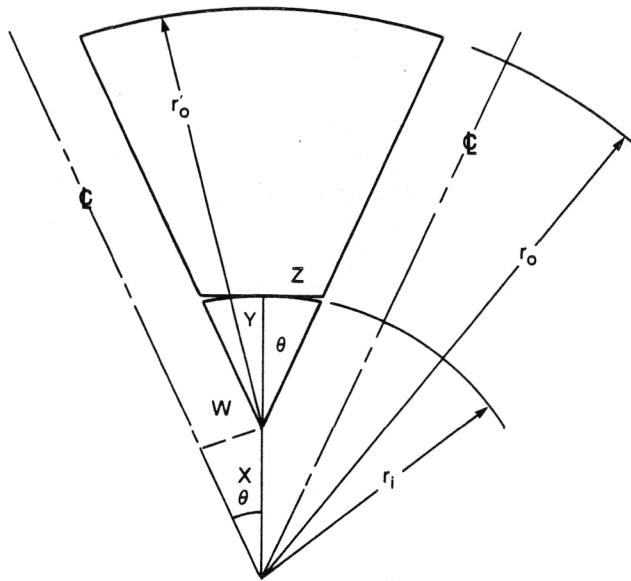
Proposed Magnet Dimensions—Engineering Model Motor
